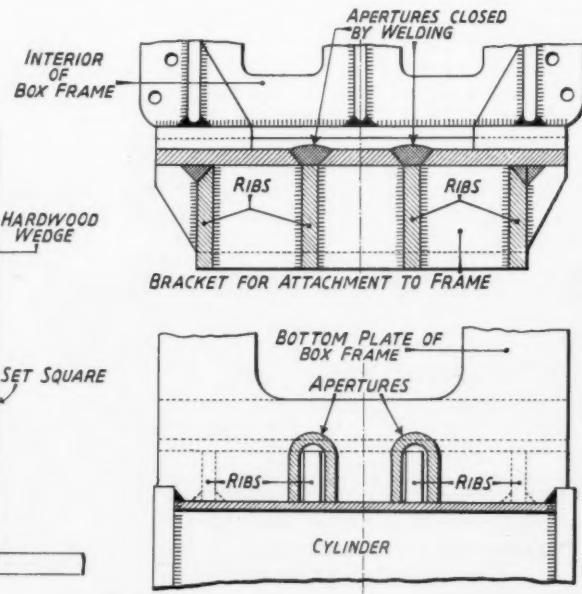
(right)—Showing method of welding ribs to fixing bracket and lower plate of cylinder boxing
